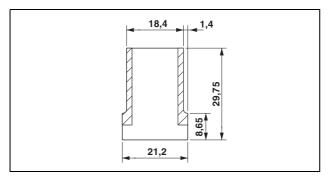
Dimensions of the PCB with housing covers ME-IO 18,8 C 2U 7035 and ME-IO 18,8 C 3U S1 7035
